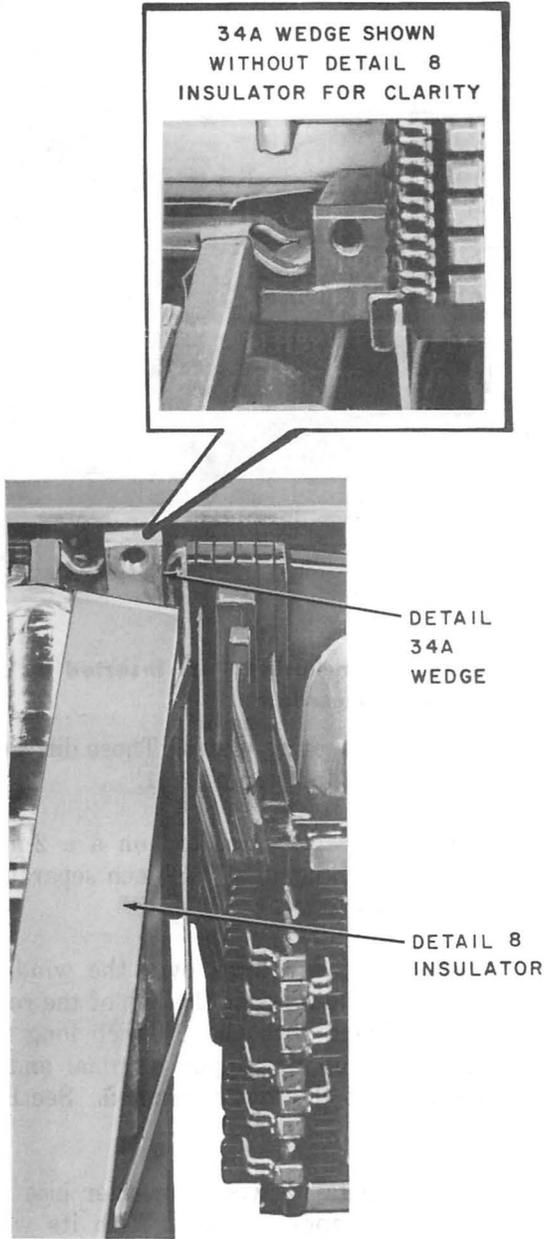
Details 34A and 34B Wedges in Place With Detail 8 Insulators (34B not shown)
